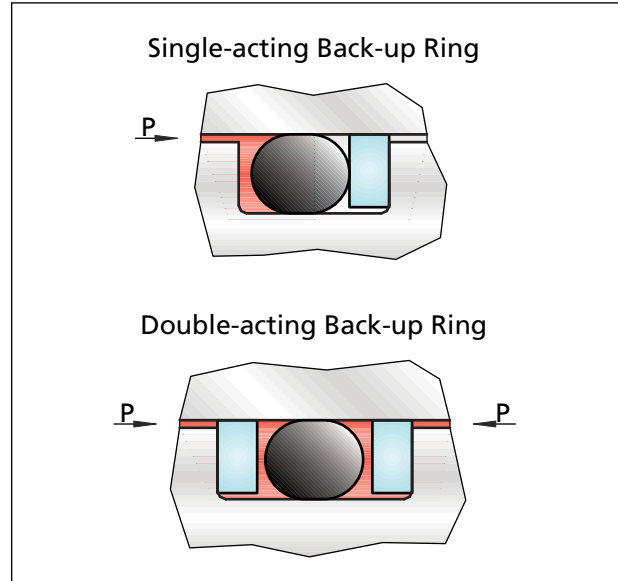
Single-acting and double-acting sealing configurations with Back-up Rings
